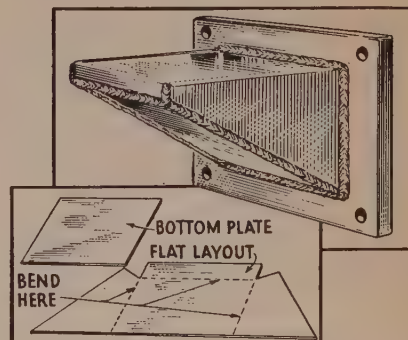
Improved product appearance . . . box-type construction with members sheared, bent to form and welded.
